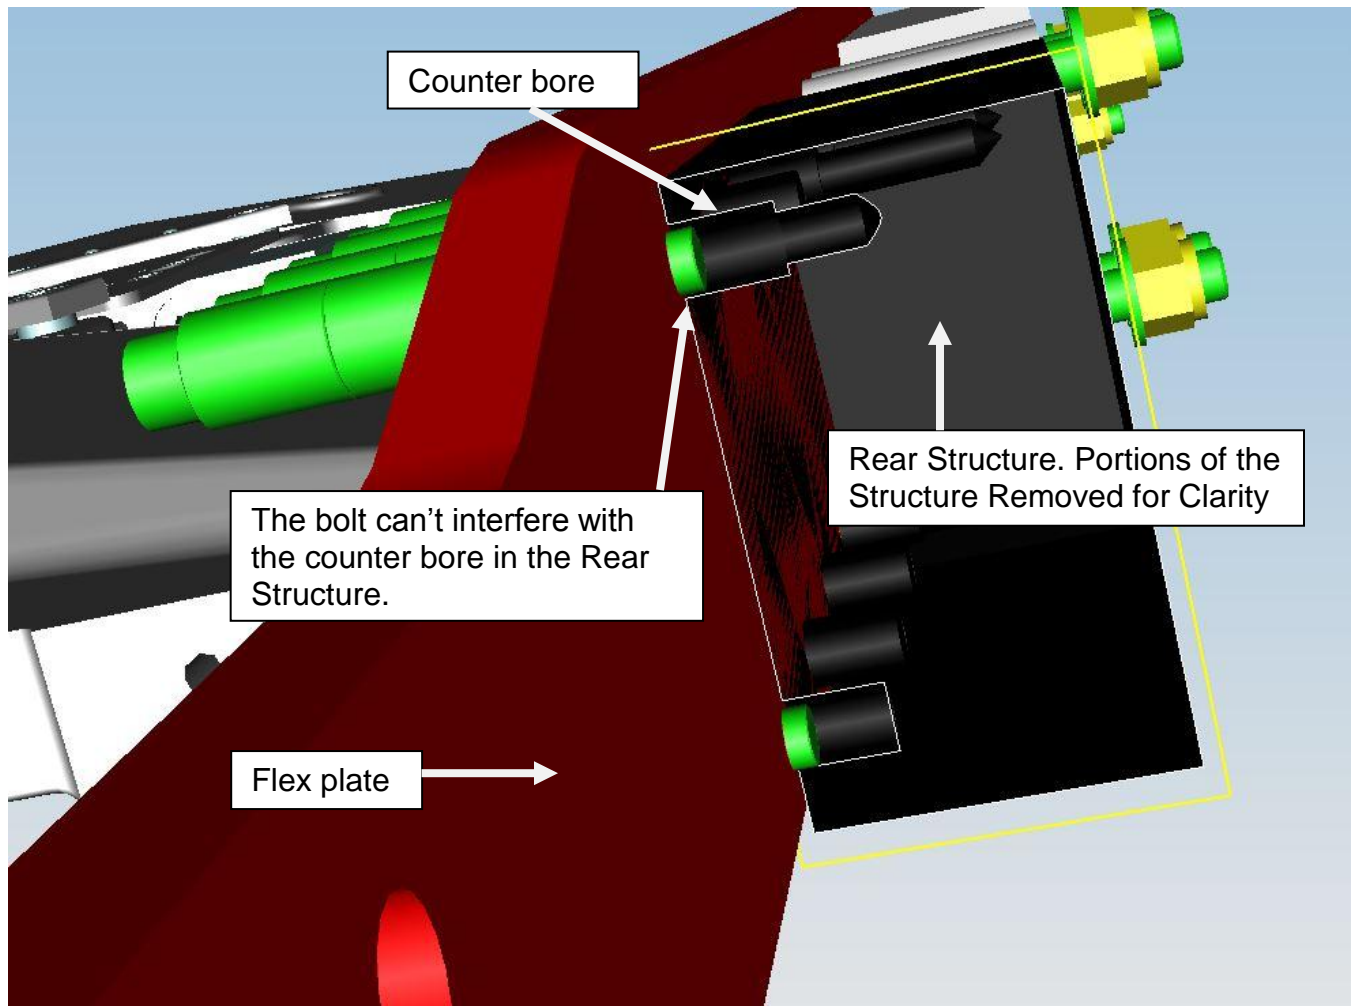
Ensure Bolts Do Not Interfere With Counter Bore in Rear Structure
